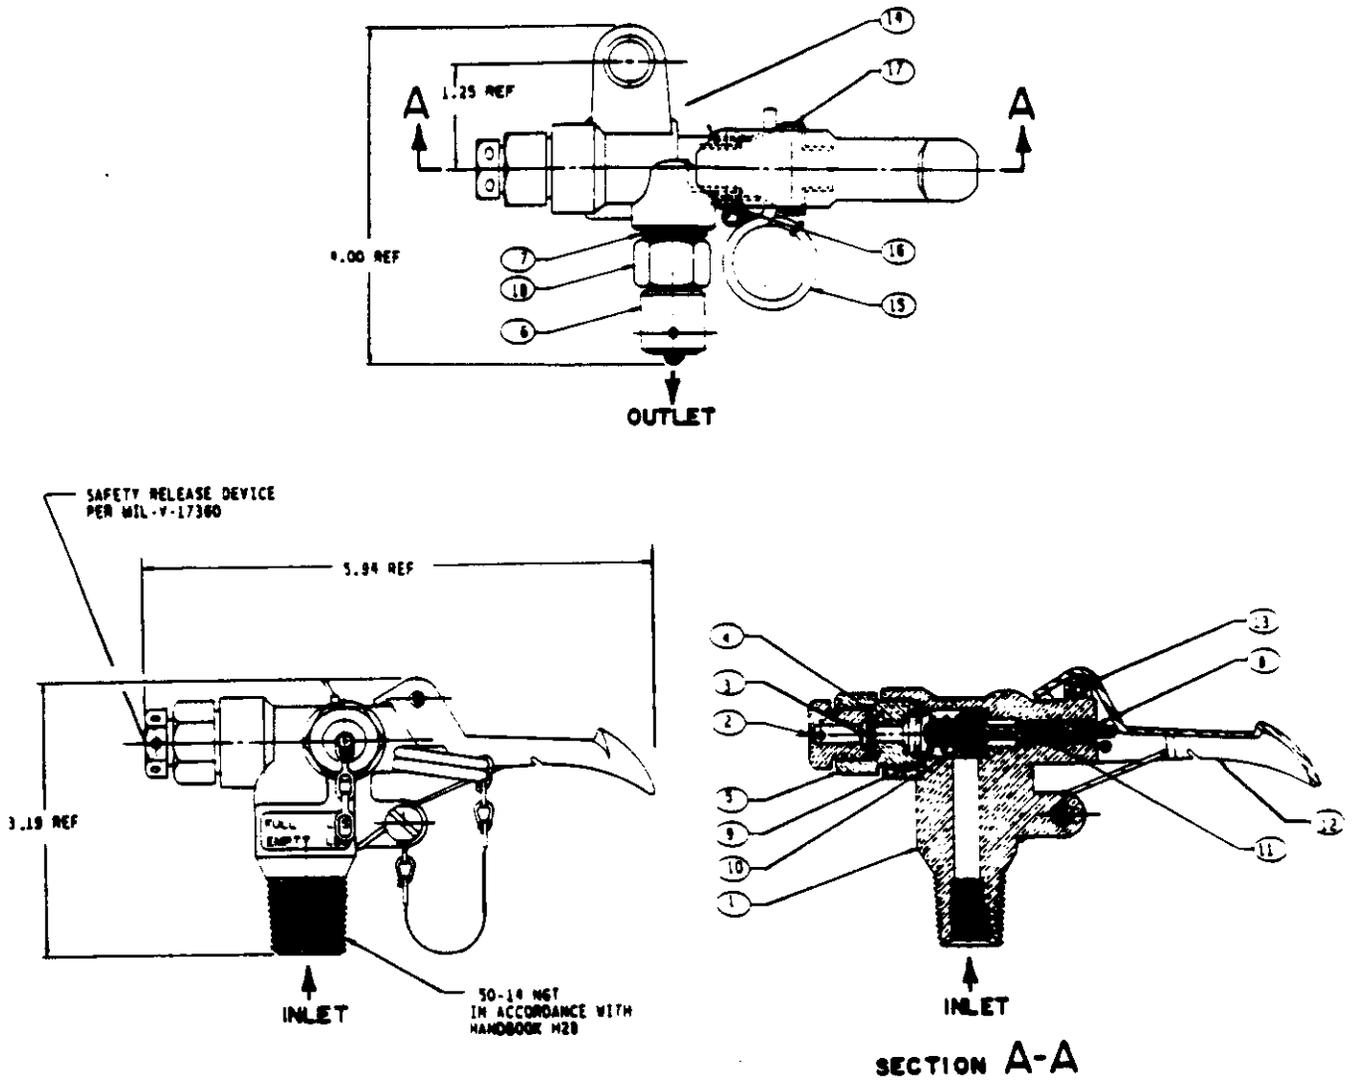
Valve, Cylinder, CO₂ Actuator
